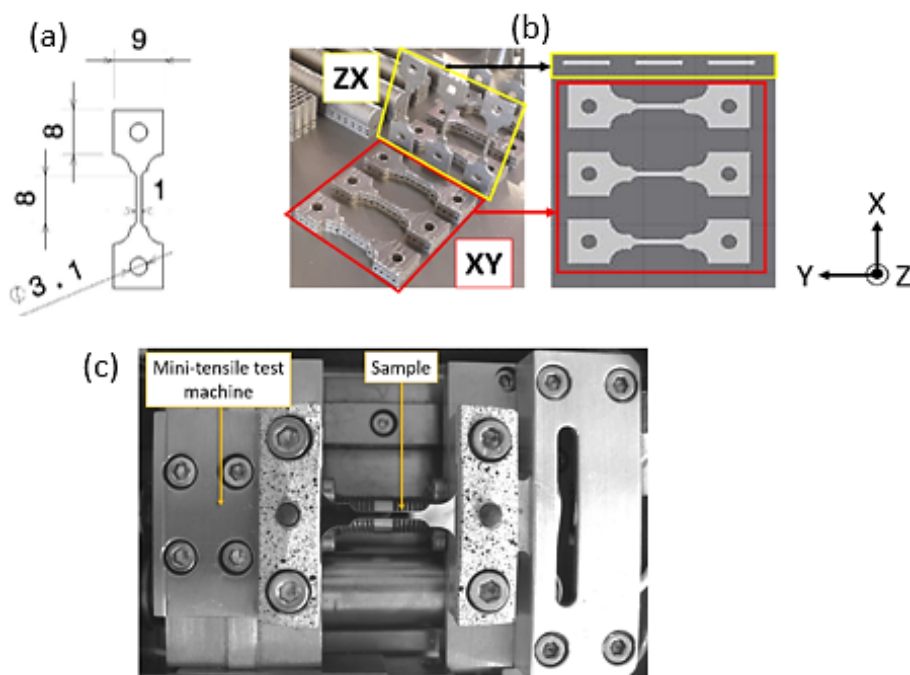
(a) tensile sample form and dimension in mm with a tolerance ± 0.1 mm (b) Specimen printed in XY and ZX building direction on the substrate plate (pictures and CAD model) (c) specimen mounted in the micro-tensile machine
